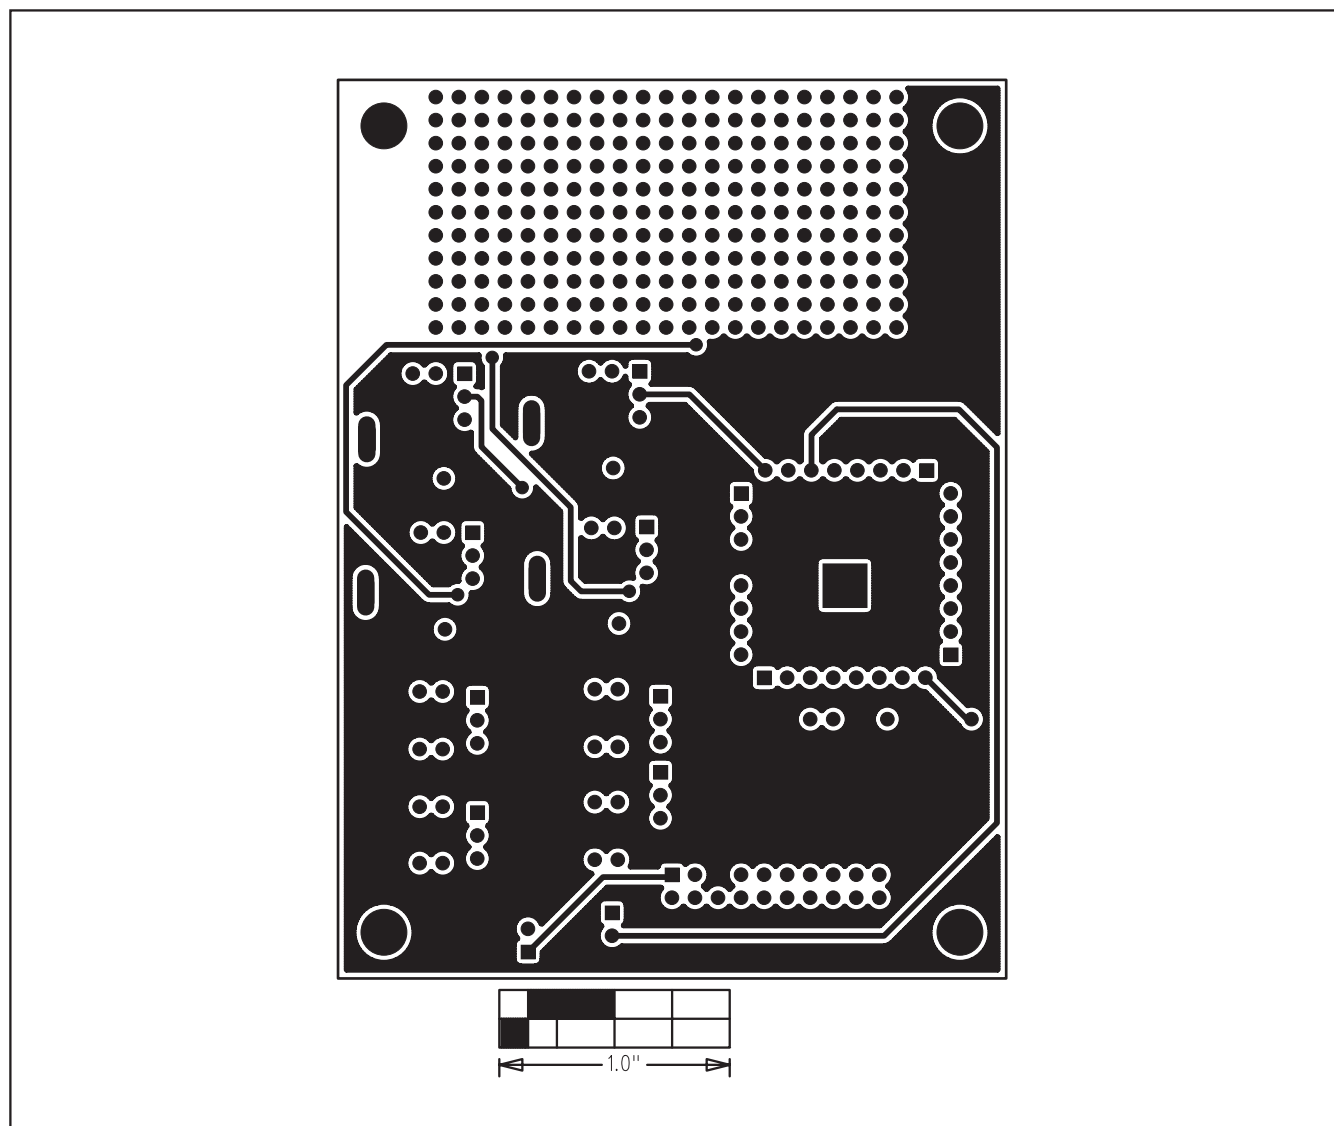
MAX6870 EV Kit PC Board Layout—Solder Side
